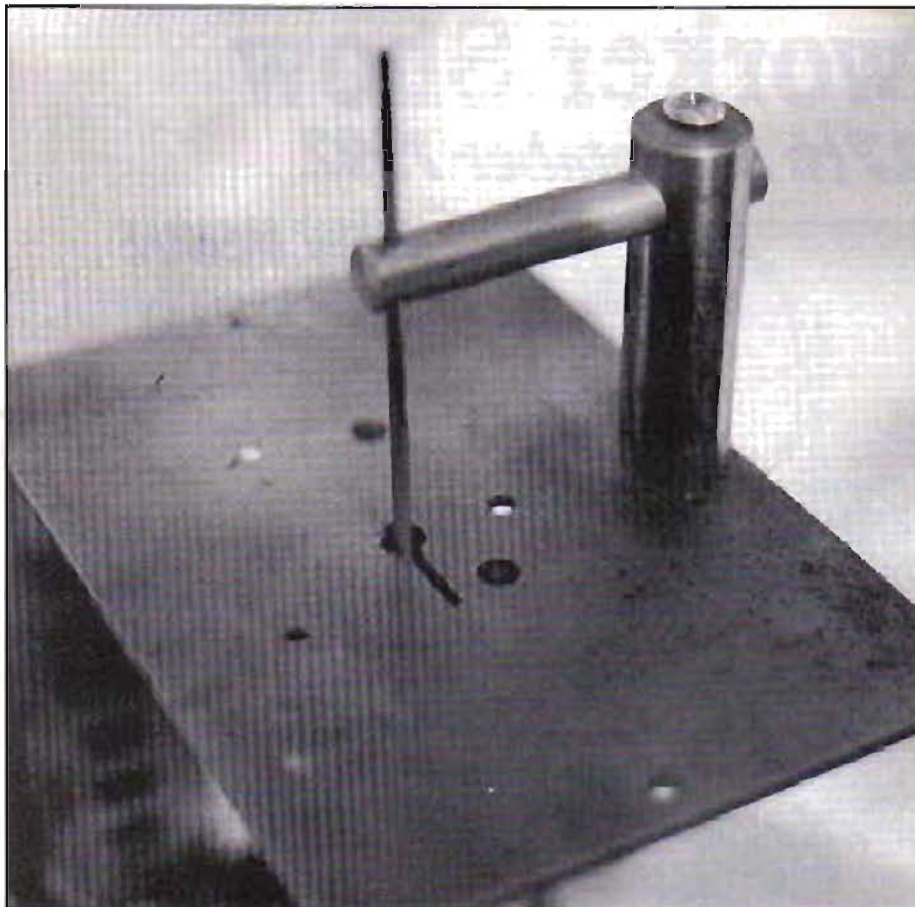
The conversion to a filing machine; the file cuts on the down stroke
